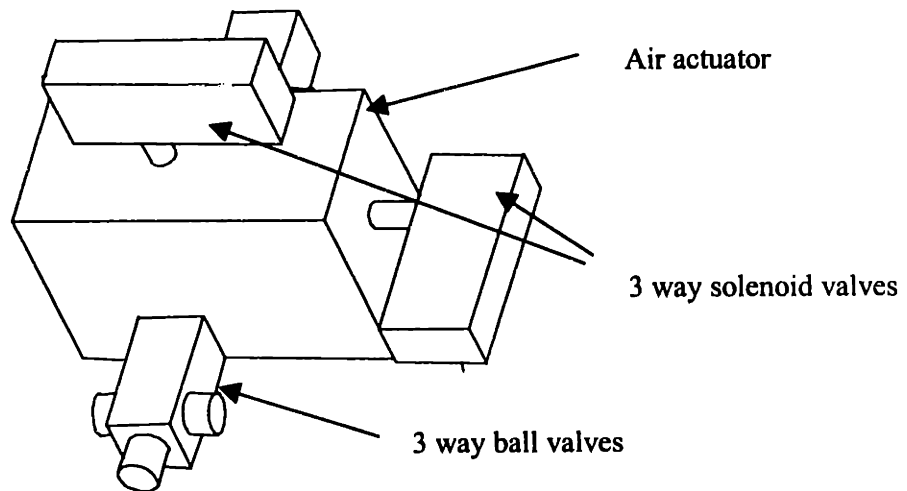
Sketch of the solenoid/actuator/ball valve subassembly
